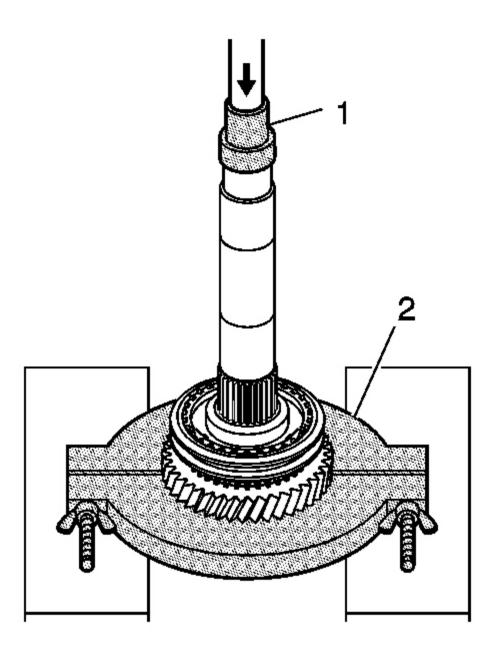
Removing Bearing Collar Using Press Courtesy of GENERAL MOTORS CORP.
